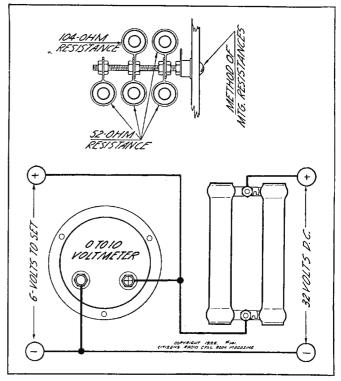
Above is the graphic diagram, by means of which the supply unit may be wired. In the detail drawing above the graphic is shown the method of mounting the resistors in parallel
